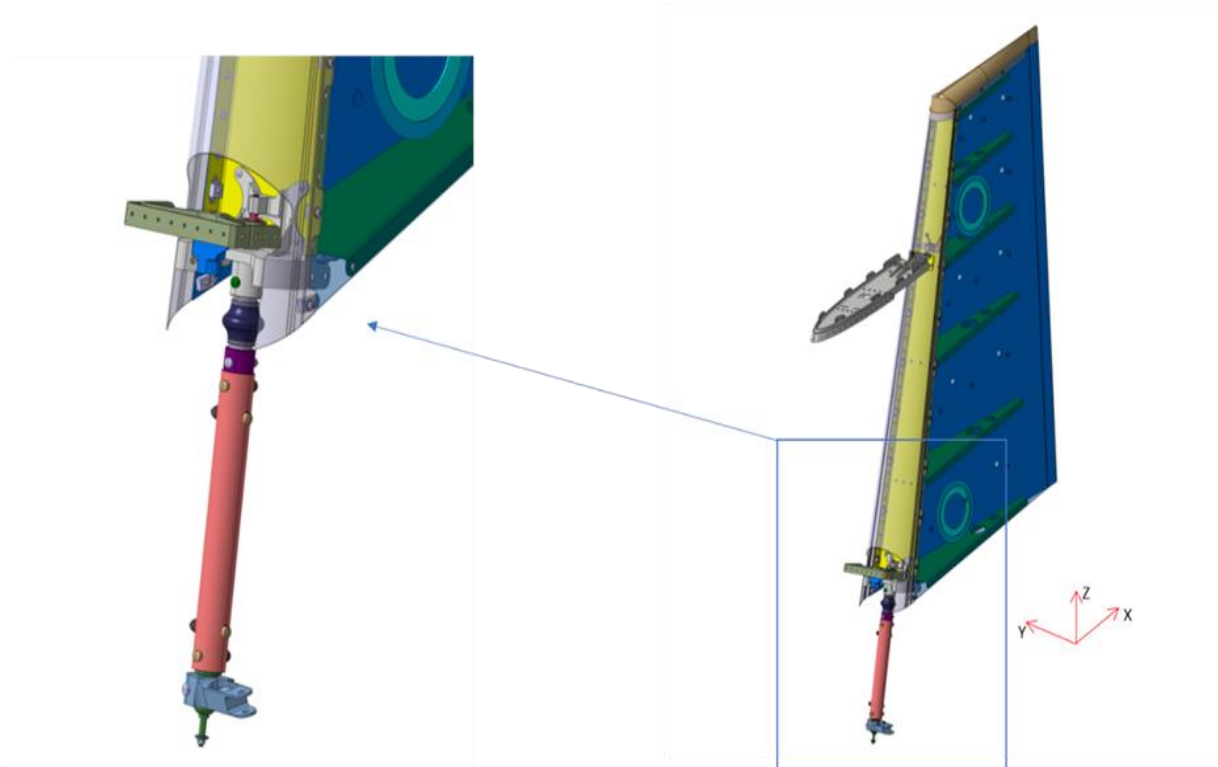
The CFRTP rudder assembly depicting the bottom bracket [50].
